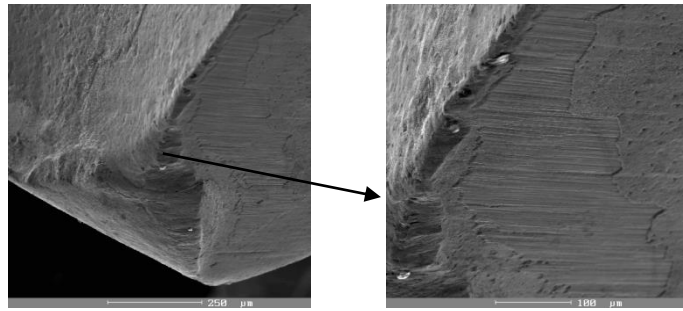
Coat damage on dorsal area - gradual coat laminar flaking on the cutting tool, cutting speed $v_c=50$ m per min, feed $f=0.08$ mm per rev.
